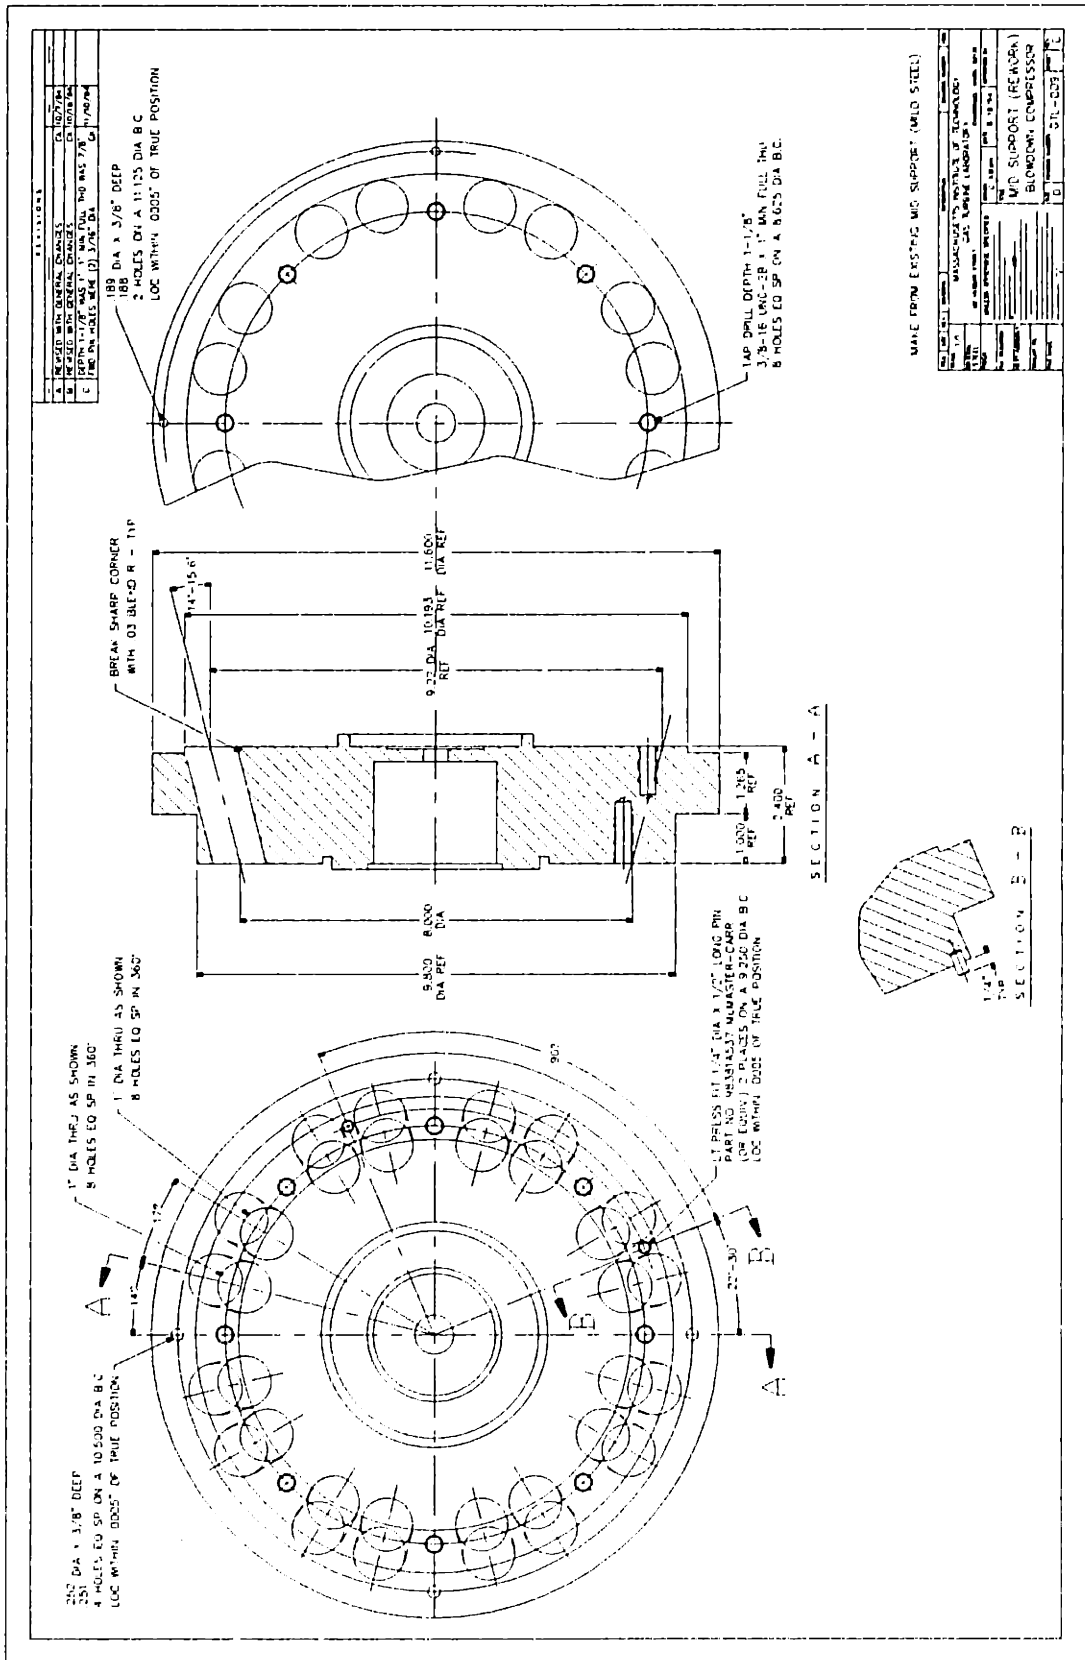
Fan stage drawing (GTL-009): modification to rear bearing housing
